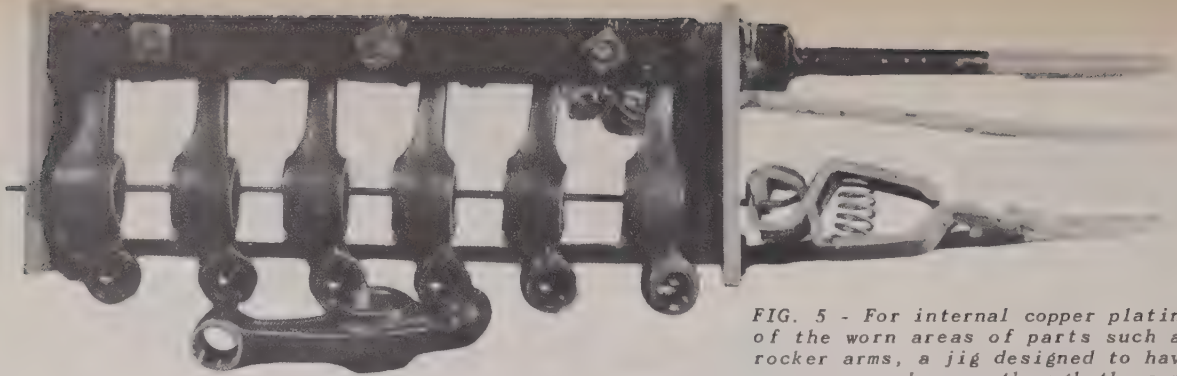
For internal copper plating of the worn areas of parts such as rocker arms, a jig designed to have a copper anode pass through the centers of the part interiors is used.
